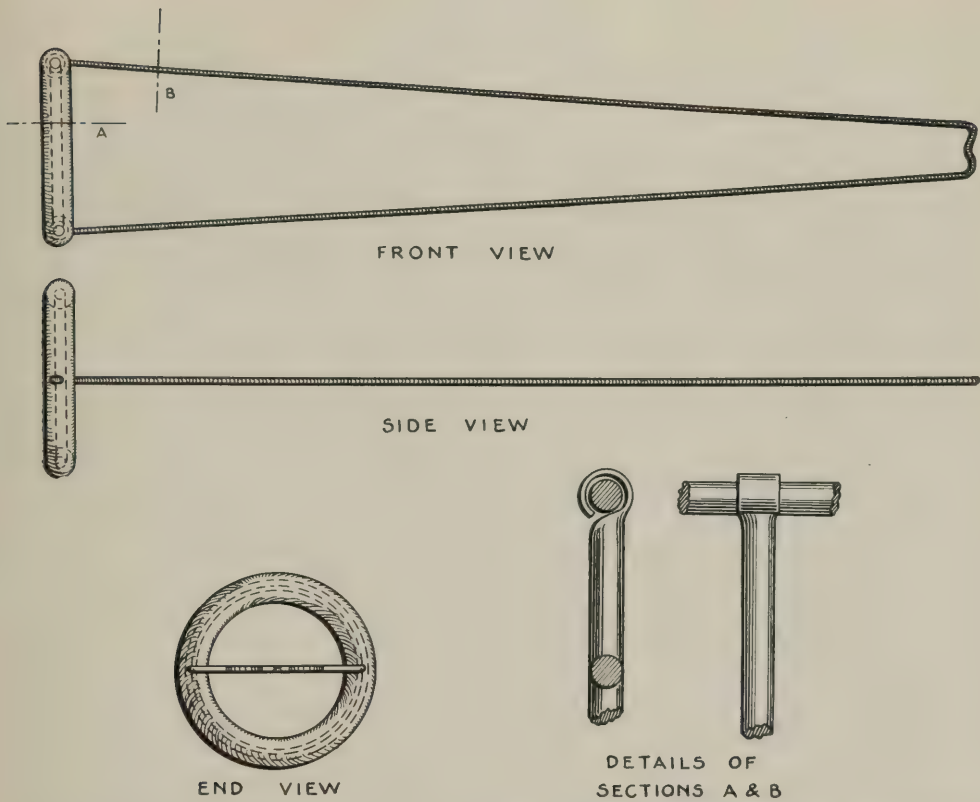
Mechanical drawing of Thomas traction arm splint. For bed treatment chiefly. Uses: Injuries to the shoulder joint; to the shaft of the humerus; to the elbow joint; to the forearm
